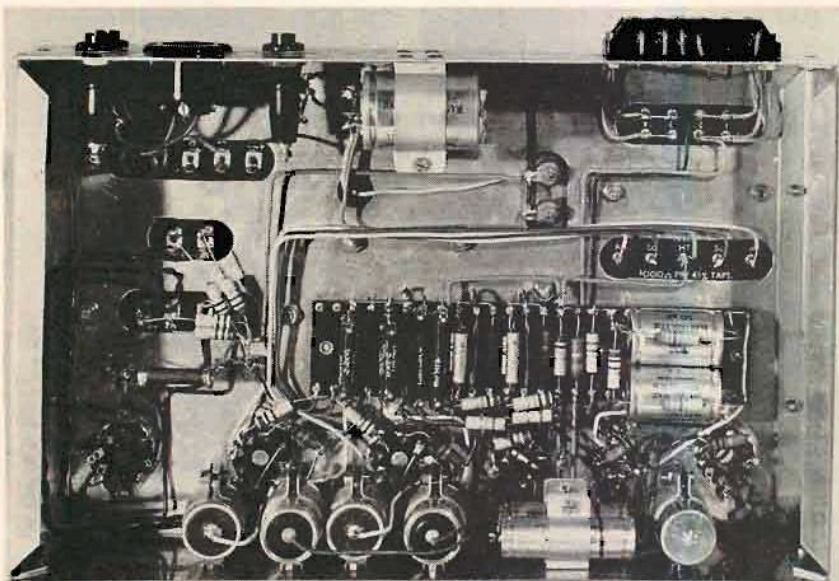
Underside of chassis, showing placement of parts and wiring arrangement.
